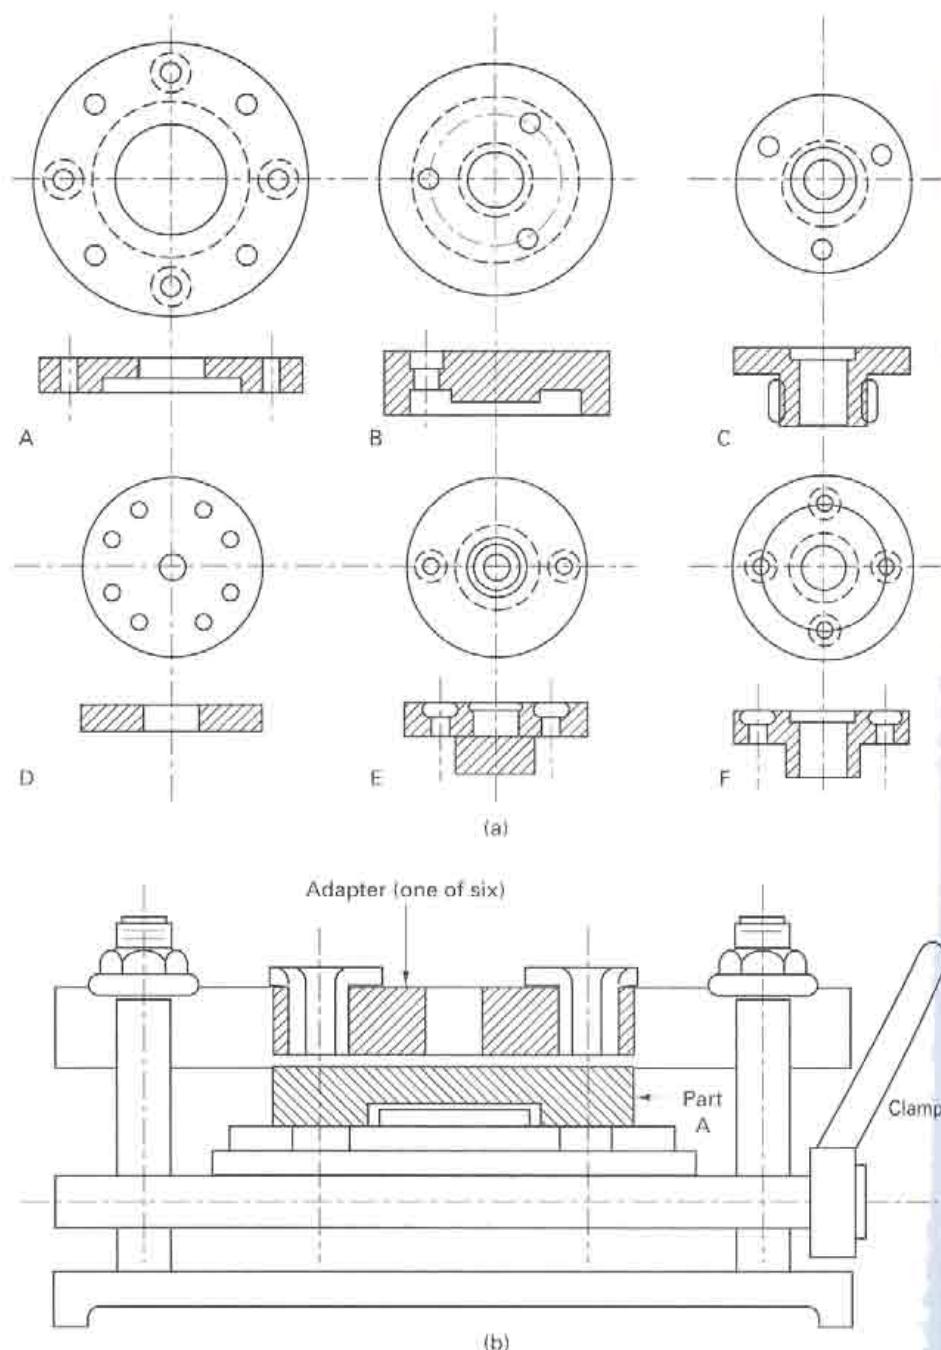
Master jig designed for a family of similar components. (a) Part family of rounds plates (six parts, A–F); (b) group jig for drilling, showing adapter and part A.
